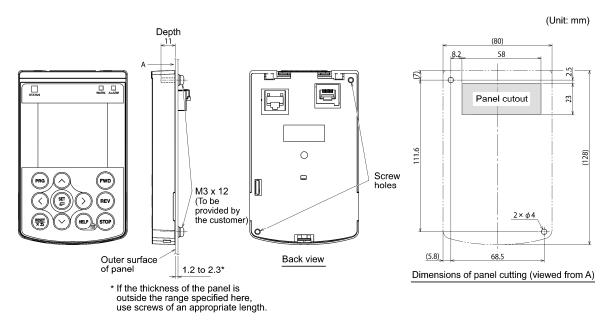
Location of Screw Holes and Dimension of Panel Cutout
